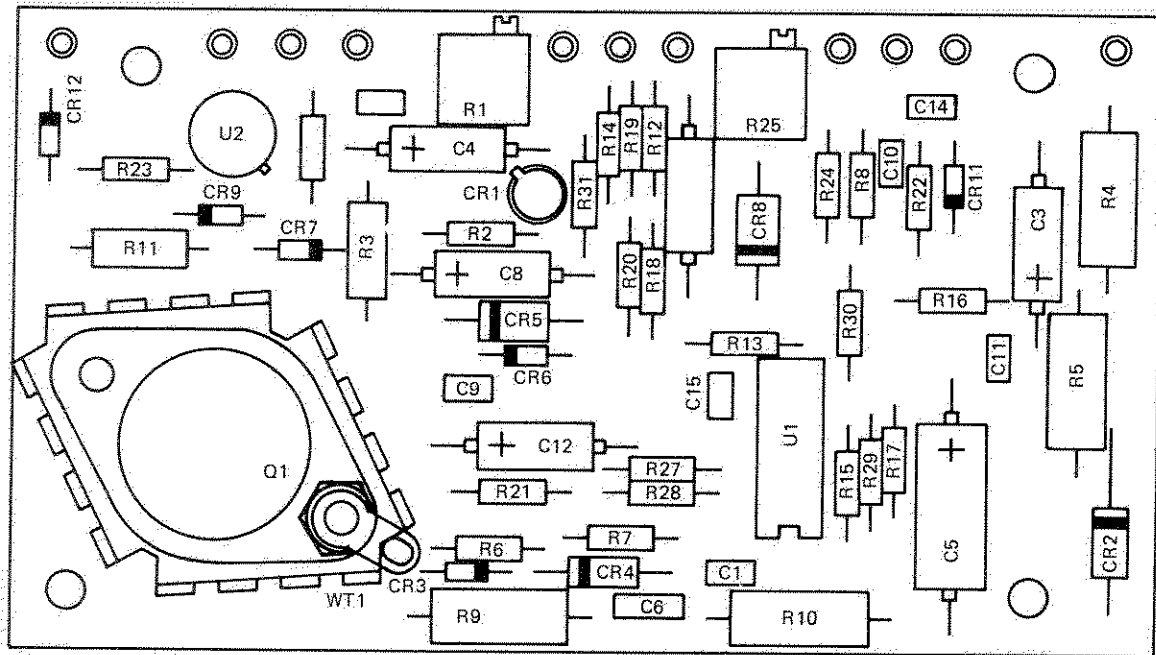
+5 V Dc Power Supply Assembly (7343912G1) Parts Location Diagram.
